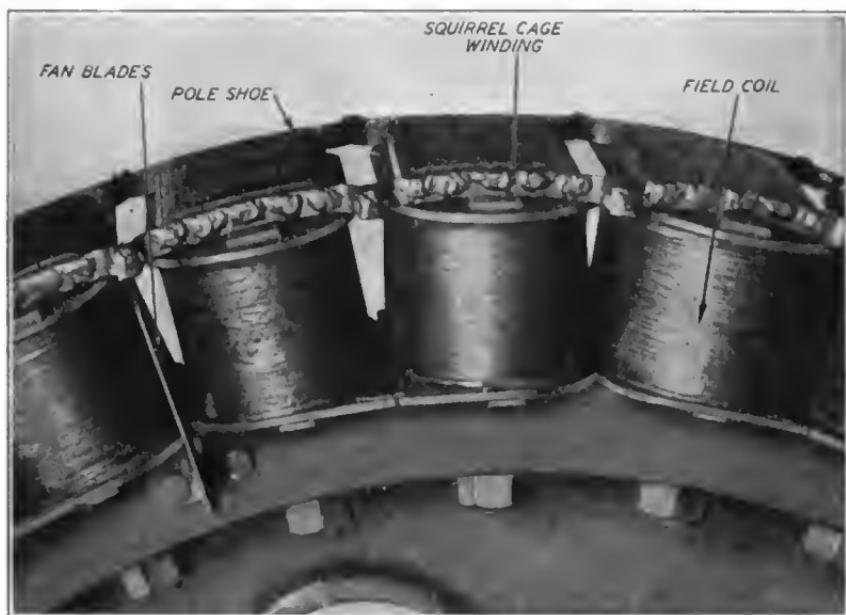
A Partial Rotor Assembly Showing Method of Fastening Field Coils and Poles to Rotor
